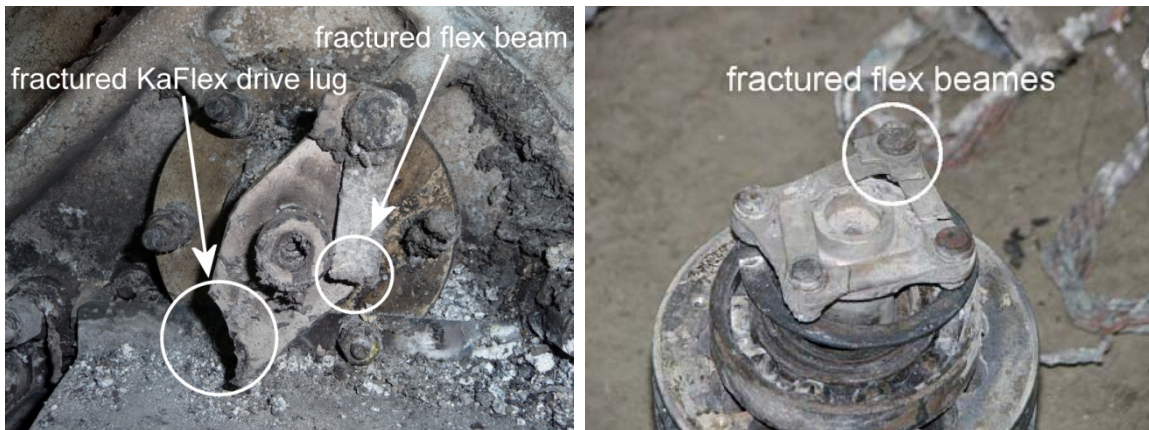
and 6: KaFlex fracture at engine power takeoff and main drive shaft
